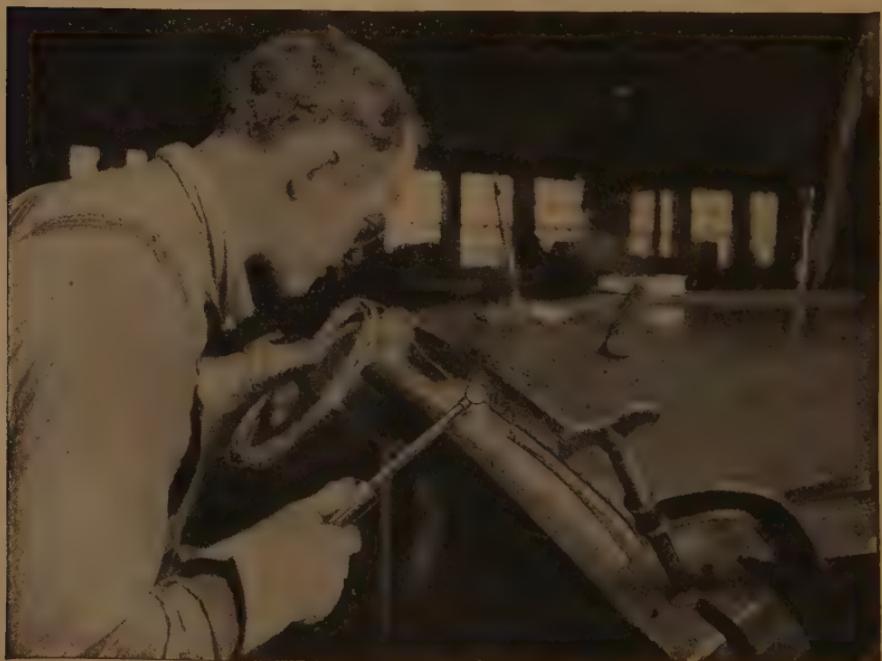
Oxy-Acetylene Welding in Manufacture of Automobile Bodies
